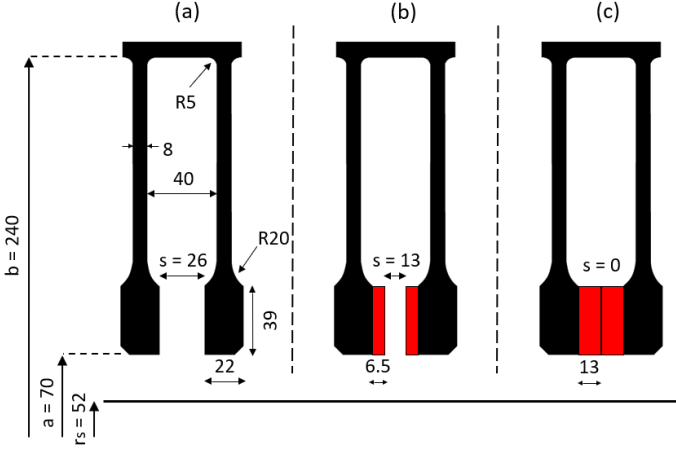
Geometrical dimensions of the cavity and possible cob configurations. Dimensions in mm.
